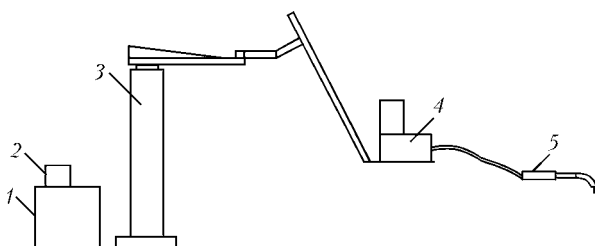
Schematic of unit for arc spot welding with upper element penetration: 1 — power source; 2 — power module of semi-automatic machine; 3 — rotating console; 4 — feed mechanism with electronic system of ASW programming and control; 5 — hose with holder
